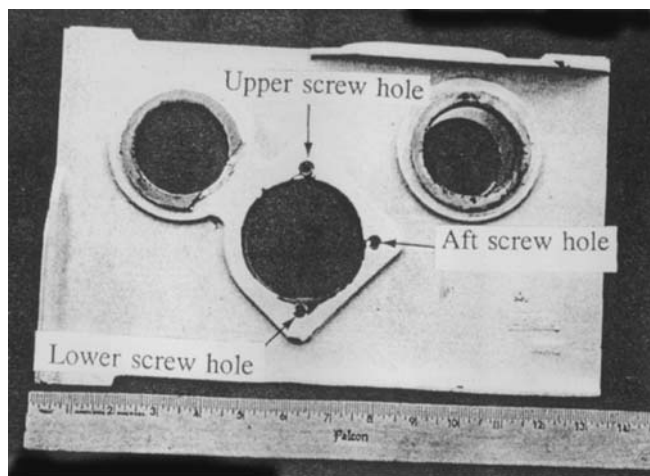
Magnesium door handle box with cracks at screw holes
